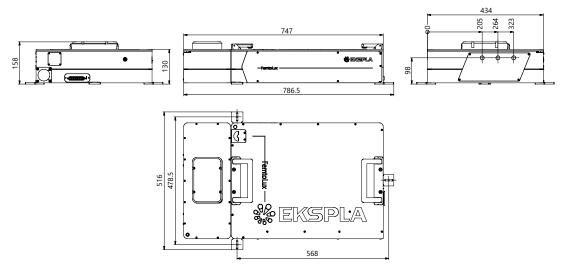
FemtoLux with harmonics module. Laser head outline drawing
